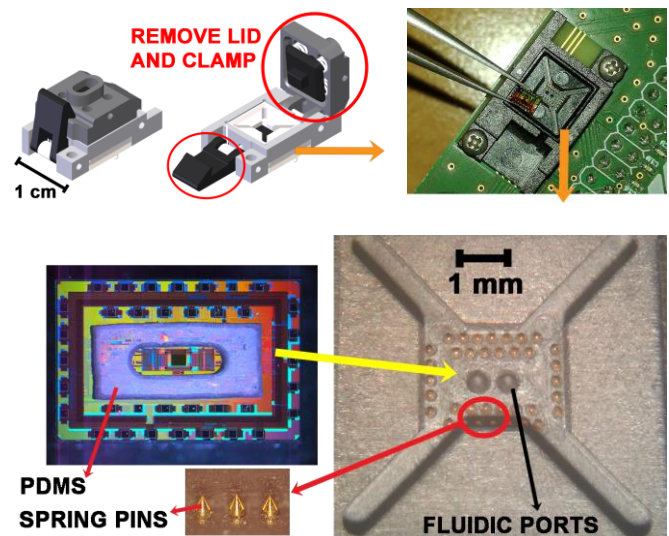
Drawings and photos of the socket and its mounting. Top left: 3D rendering of the socket assembly [31]. The lid and clamp are removed before connecting the socket to the PCB. Top right: photo of the socket mounted on the PCB, together with a chip held with tweezers. Bottom right: detail of the contact spring pins and fluidic ports in the socket. Bottom left: photo of the chip with a PDMS seal ring (the opening, at the center of the seal, is the fluidic chamber that is filled with electrolyte), and optical microscope photo of the spring pins. The chip is inserted upside-down in the socket.
